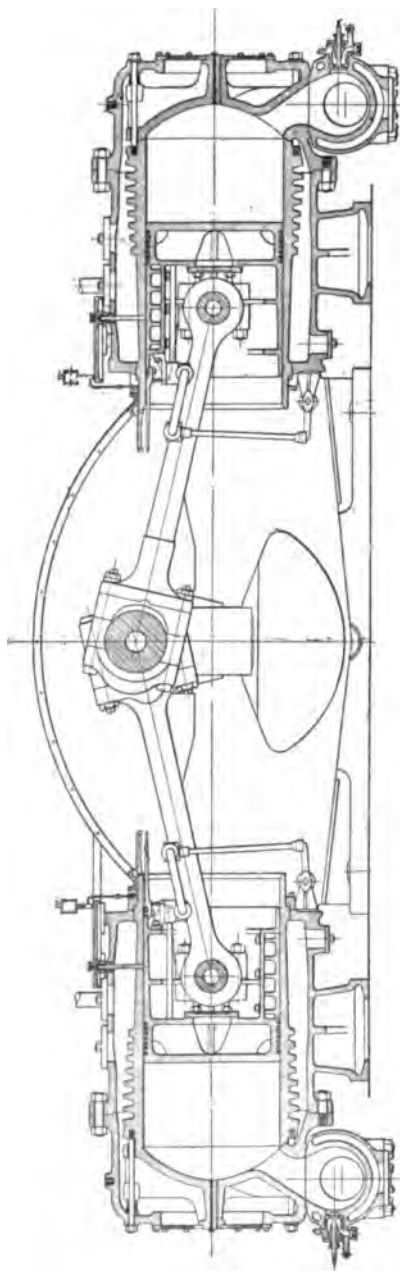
Cross-section American Crossley Gas Engine.
